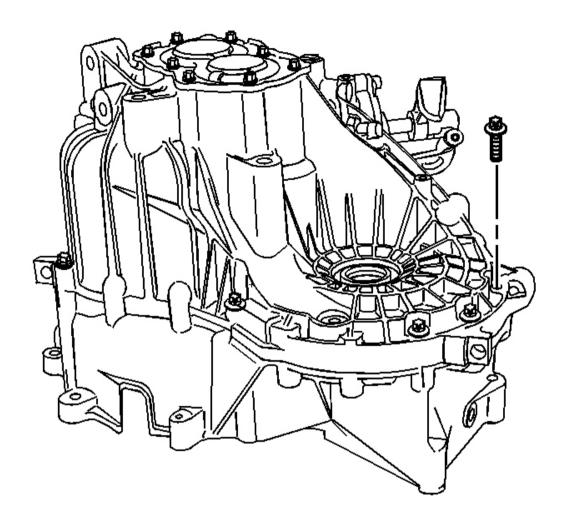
View Of Transaxle Case Side Of Housing Bolt Courtesy of GENERAL MOTORS CORP.
